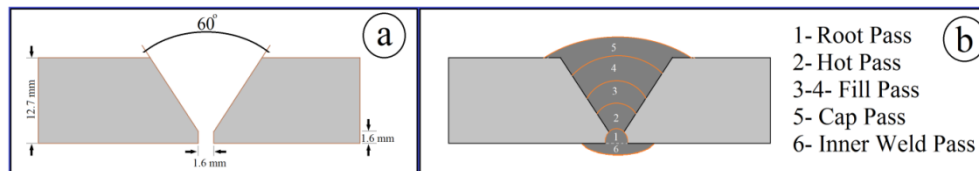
a) Welding groove geometry, b) Pass sequence.
